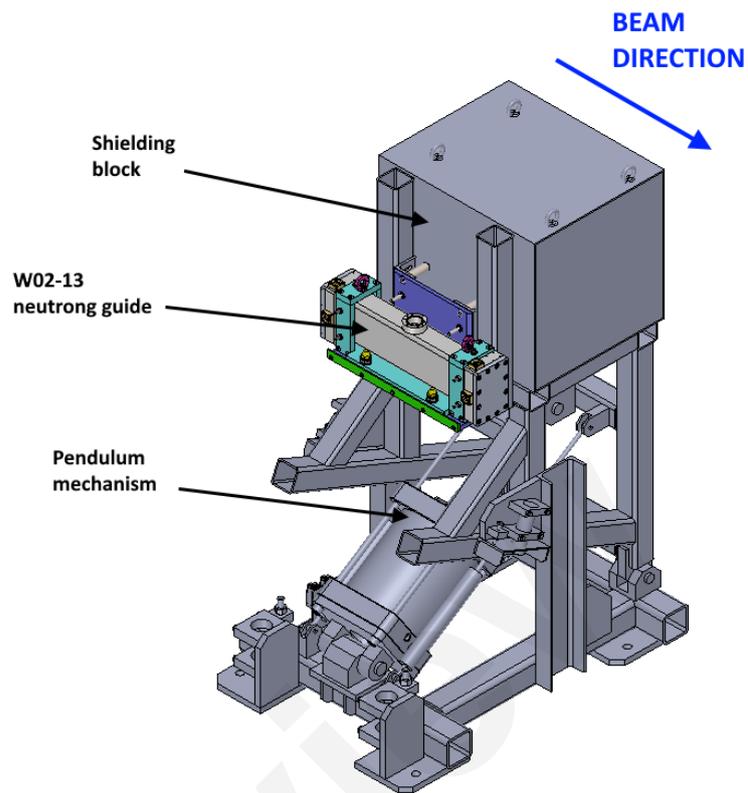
Vacuum housing of W02-13 neutron guide section and shielding block fixed on the pendulum mechanism.
